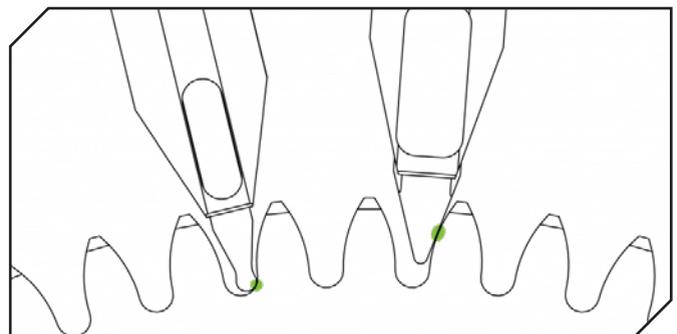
Customized sensors can be used, depending on the surface to be measured.
